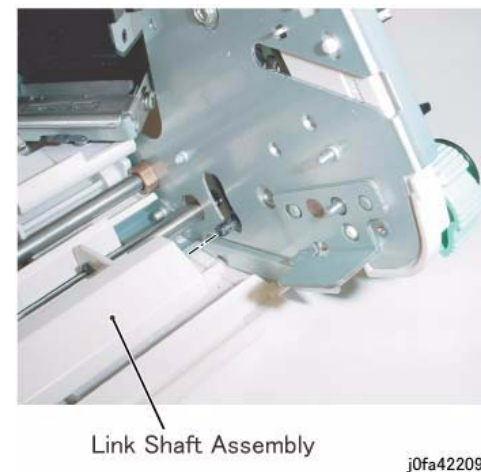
Installing the Paddle Link Assembly (j0fa42209)
